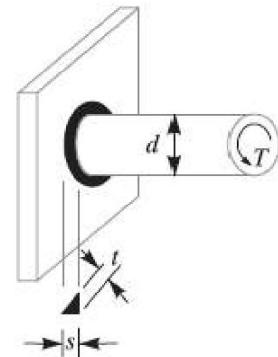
Circular fillet weld subjected to torsion.
